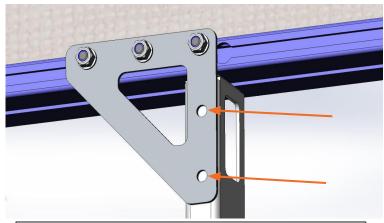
We now need to drill 2 holes through the upright Bracket using the Triangular plate as a guide
